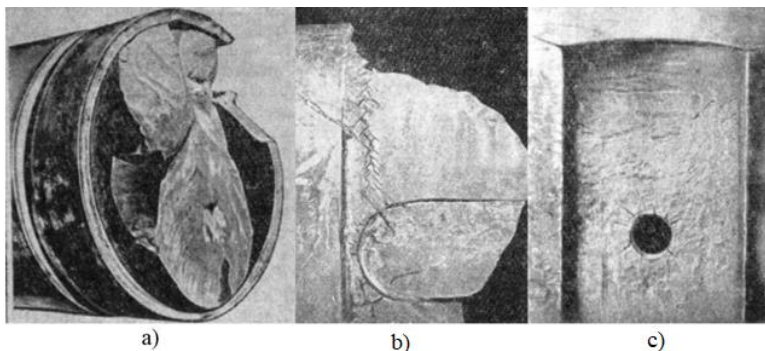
Cracks and damage in the area of the keyway.
